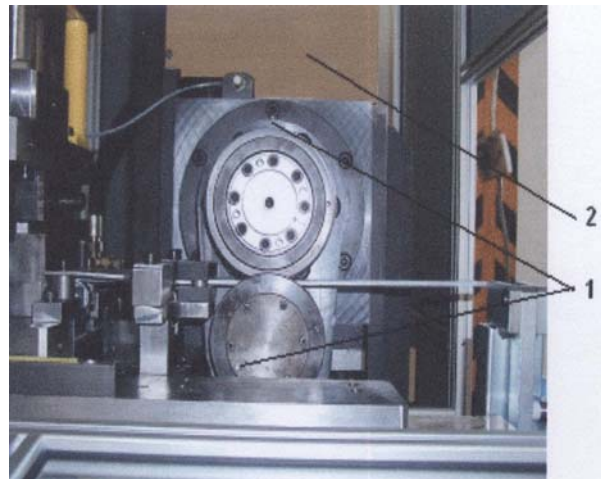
Rotary bending head. 1 – rotary bending disks, 2 – body of rotary bending head
